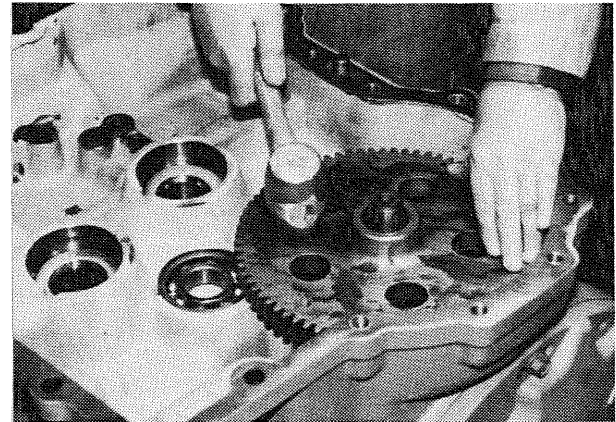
Ring Gear, Pinion and Drum Shaft (4 of 5)
